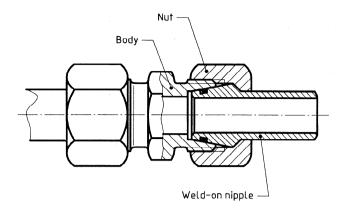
Cross-section of typical 24° cone connector with O-ring weld-on nipple
